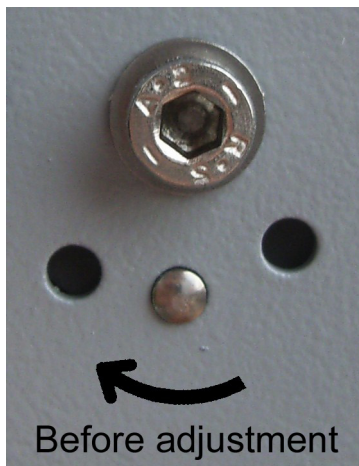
Stacker II bottom view. If "X1" is out of range: Move all holders clockwise (left) so the pin will fit into the left hole.
